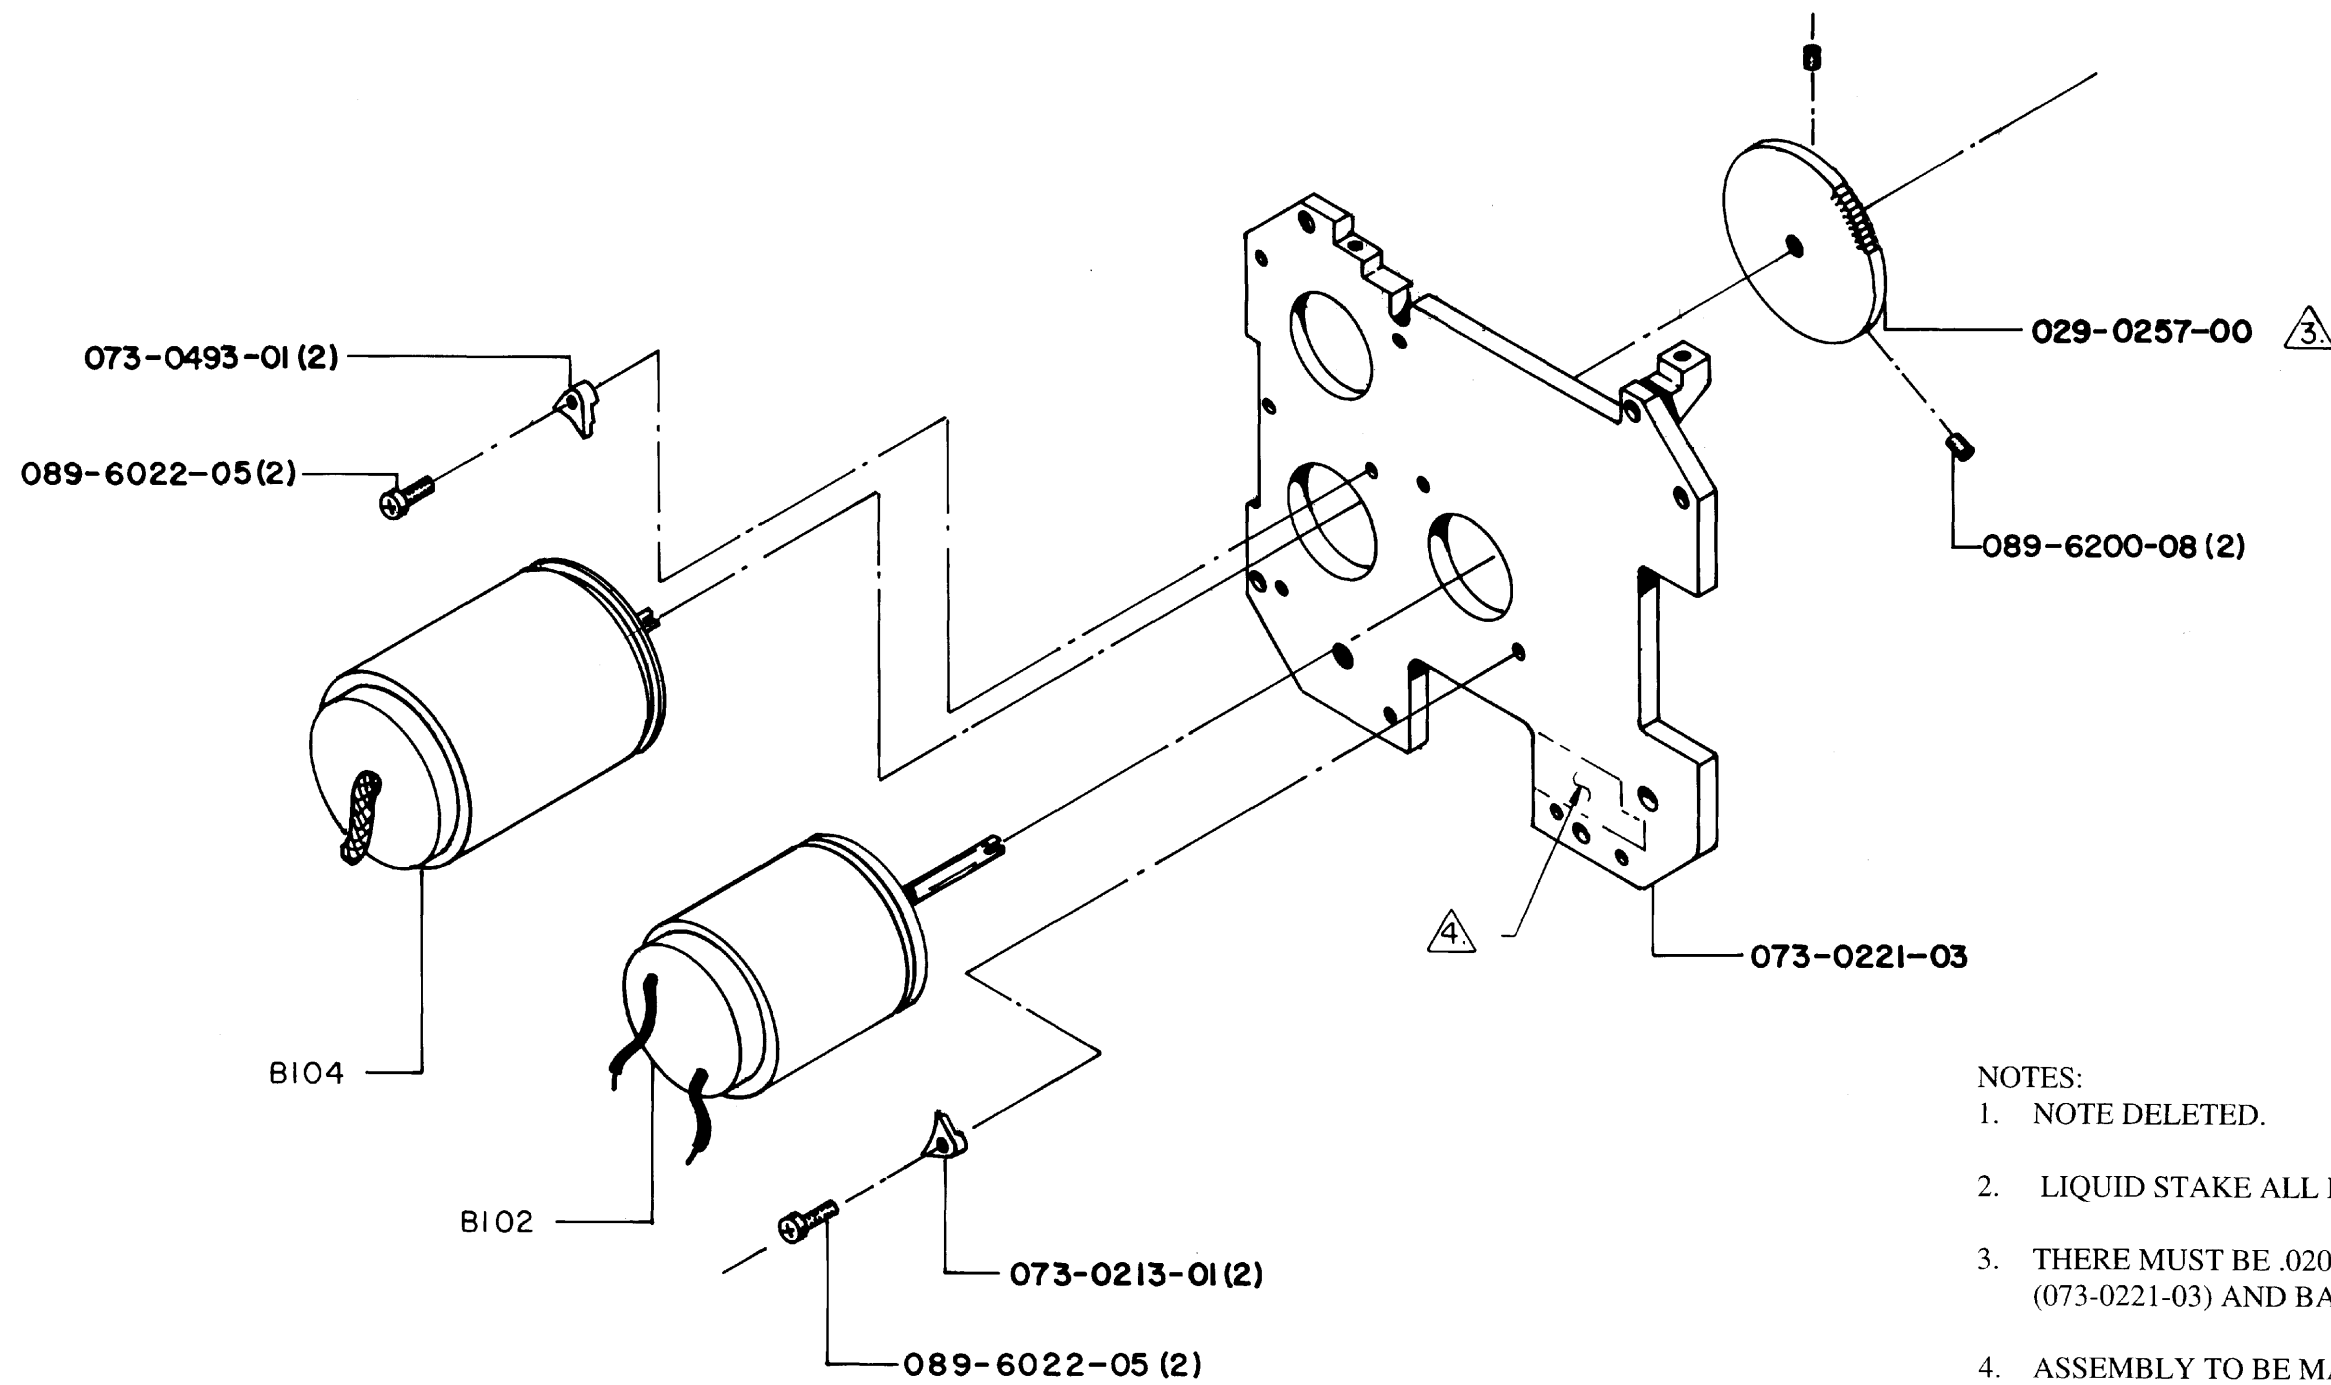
KI 525 HEADING GEAR SET ASSEMBLY
